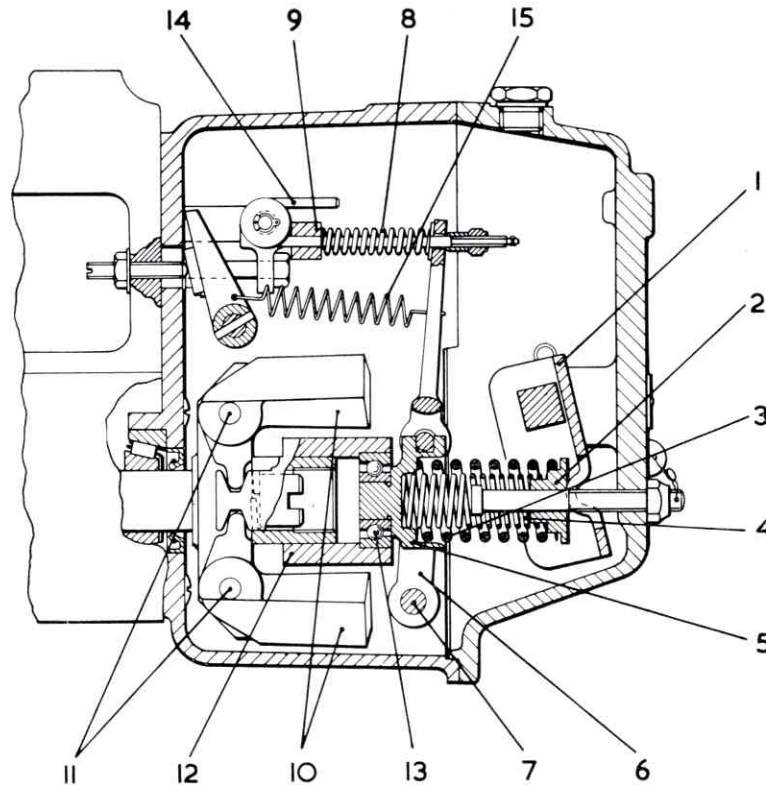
SECTION THROUGH THE S.F. GOVERNOR
